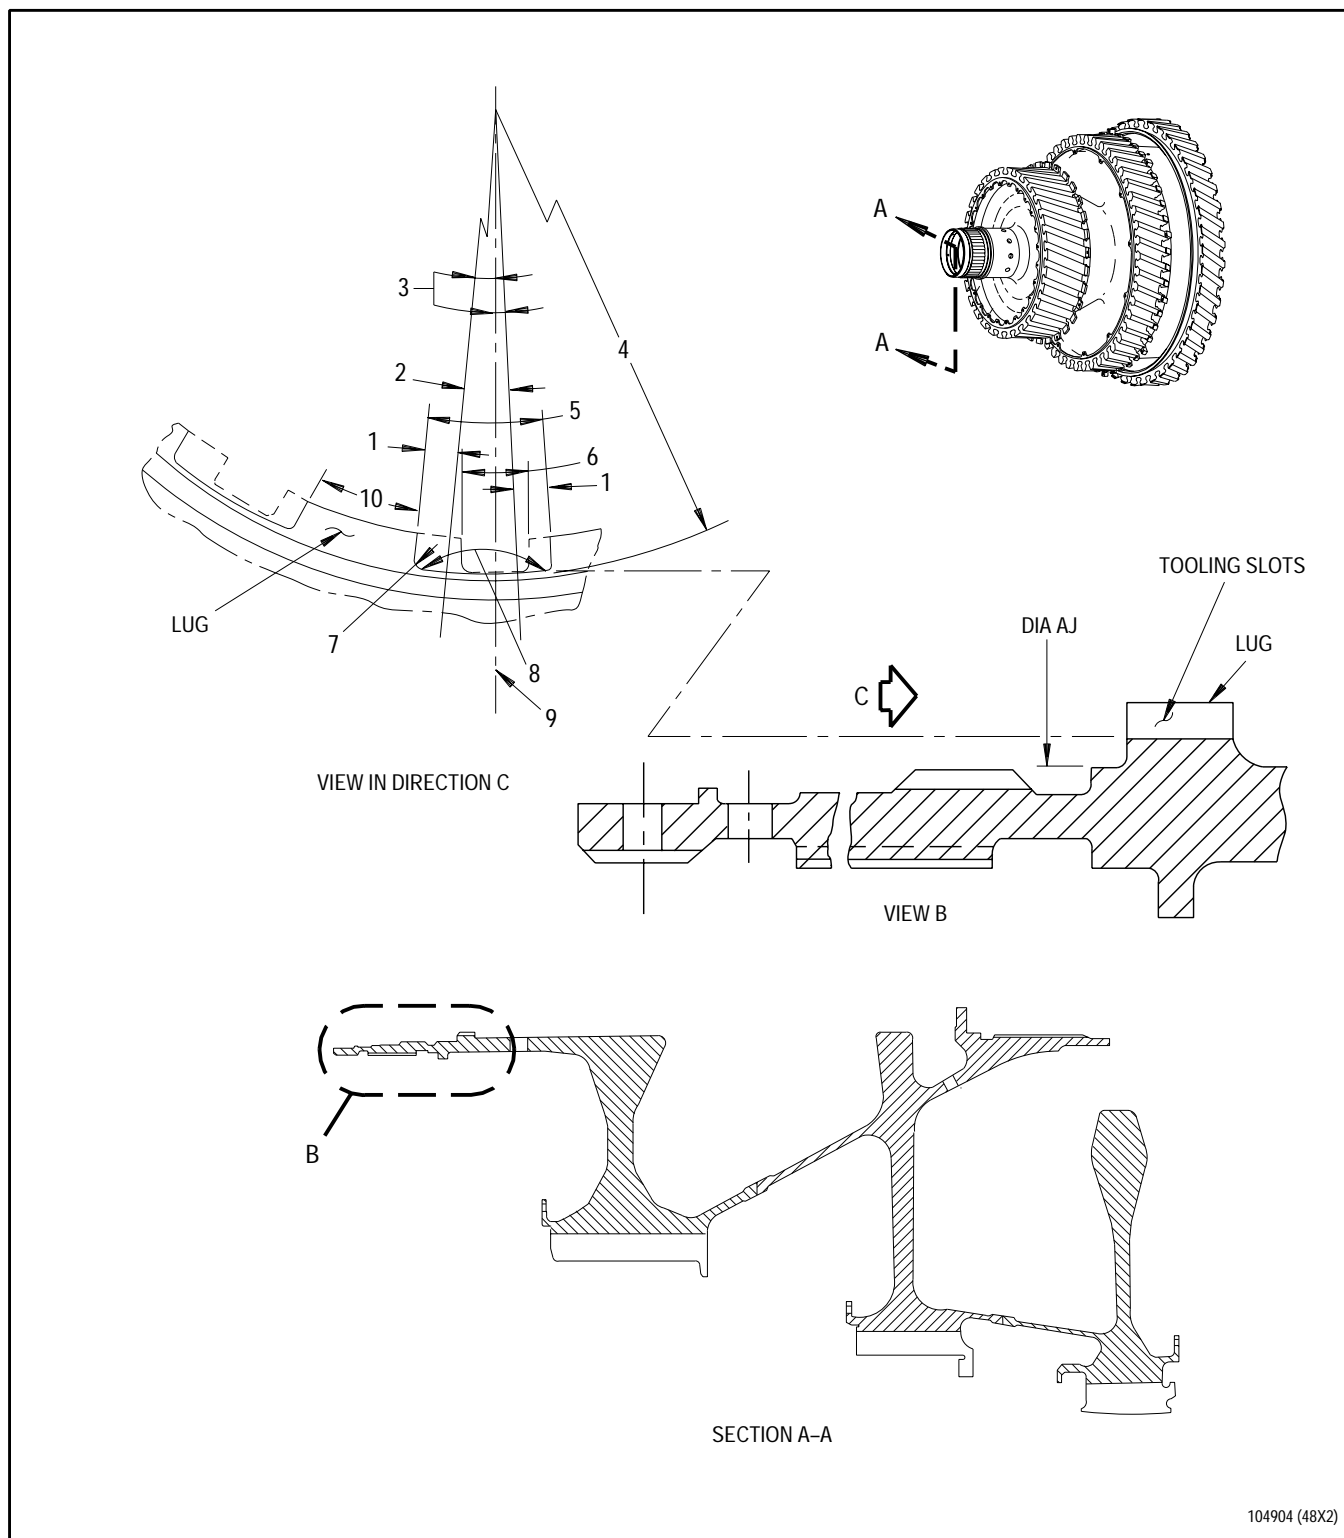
Front Compressor Drum Rotor Disk Assembly - Repair of Slots (Twelve Each)
